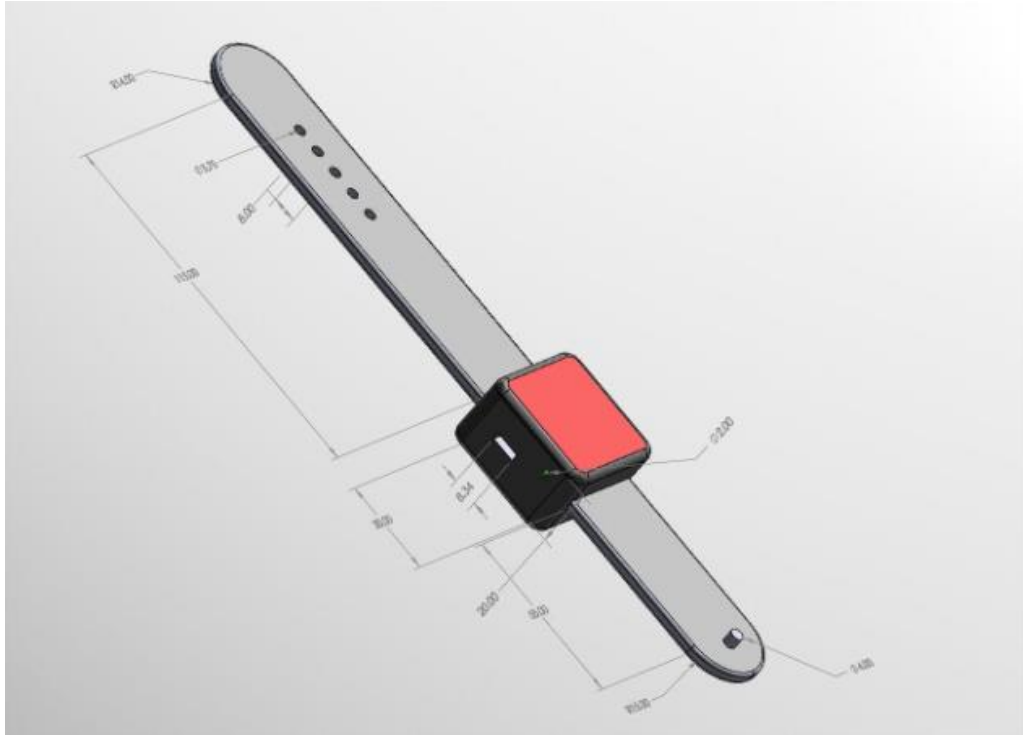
Isometric View of Proposed Final Design Drawing (all measurements in mm)
